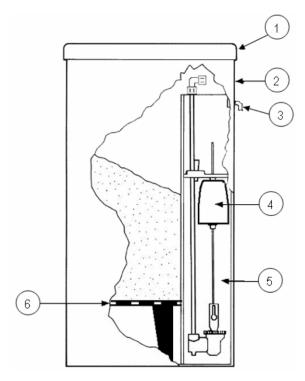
Brine Tank Assembly (T-60, T-80, T-96, T-60CX, T-80CX, and T-96CX)
